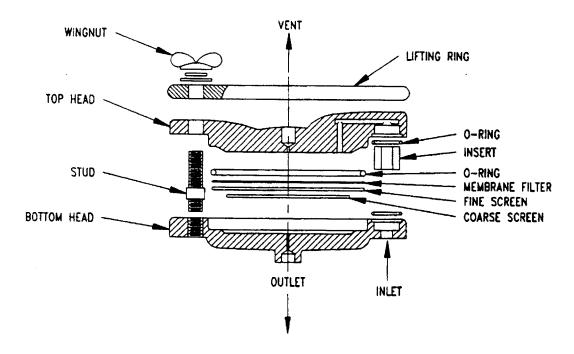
Typical Demineralizer Submicron Filter Assembly Section
